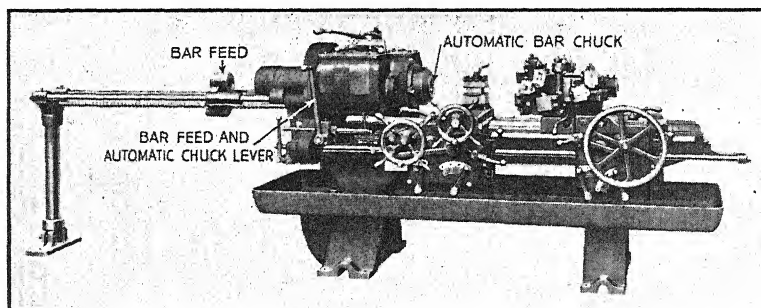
The Warner and Swasey No. 1A Universal Hollow, Hexagonal, Saddle-Type Turret Lathe Equipped with Standard Bar-Stock Equipment.
